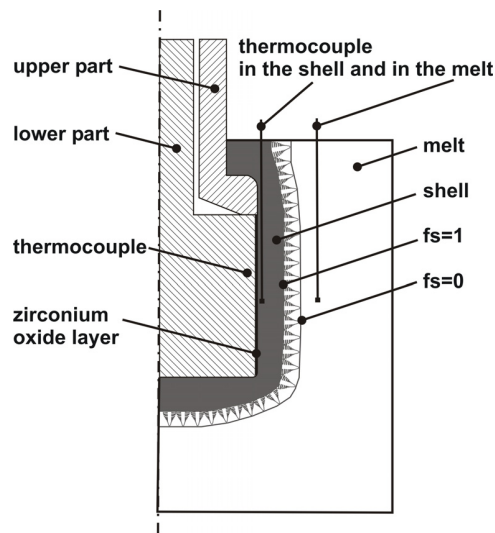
Test body with thermocouples and solidifying shell ¹⁰
